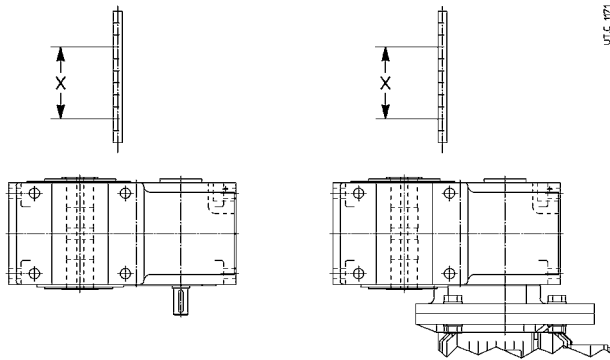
Position the helical gear reducer or gearmotor, mounting position V6 for oil level (quantity) measurement
